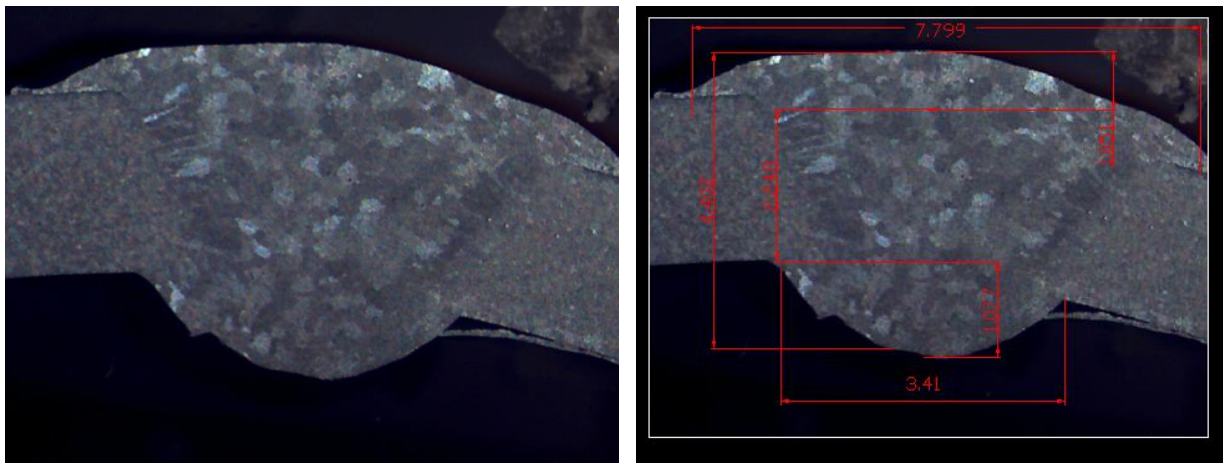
Weld bead obtained in the welding process. Units in millimetres
